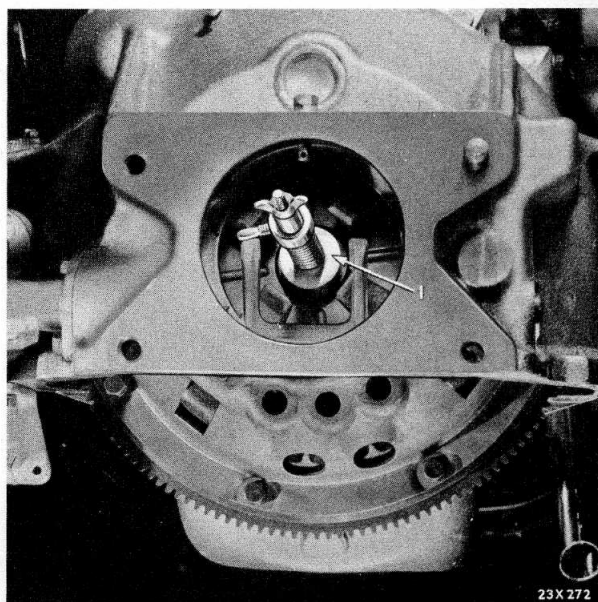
Clutch Disc Aligning Arbor, Tool C-360
